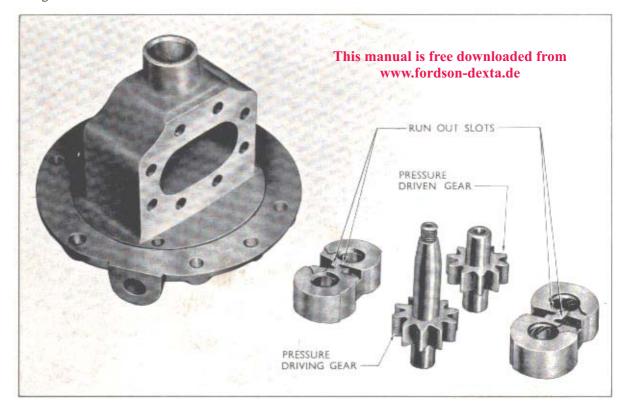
Hydraulic Pump Body, Bearings and Gears
